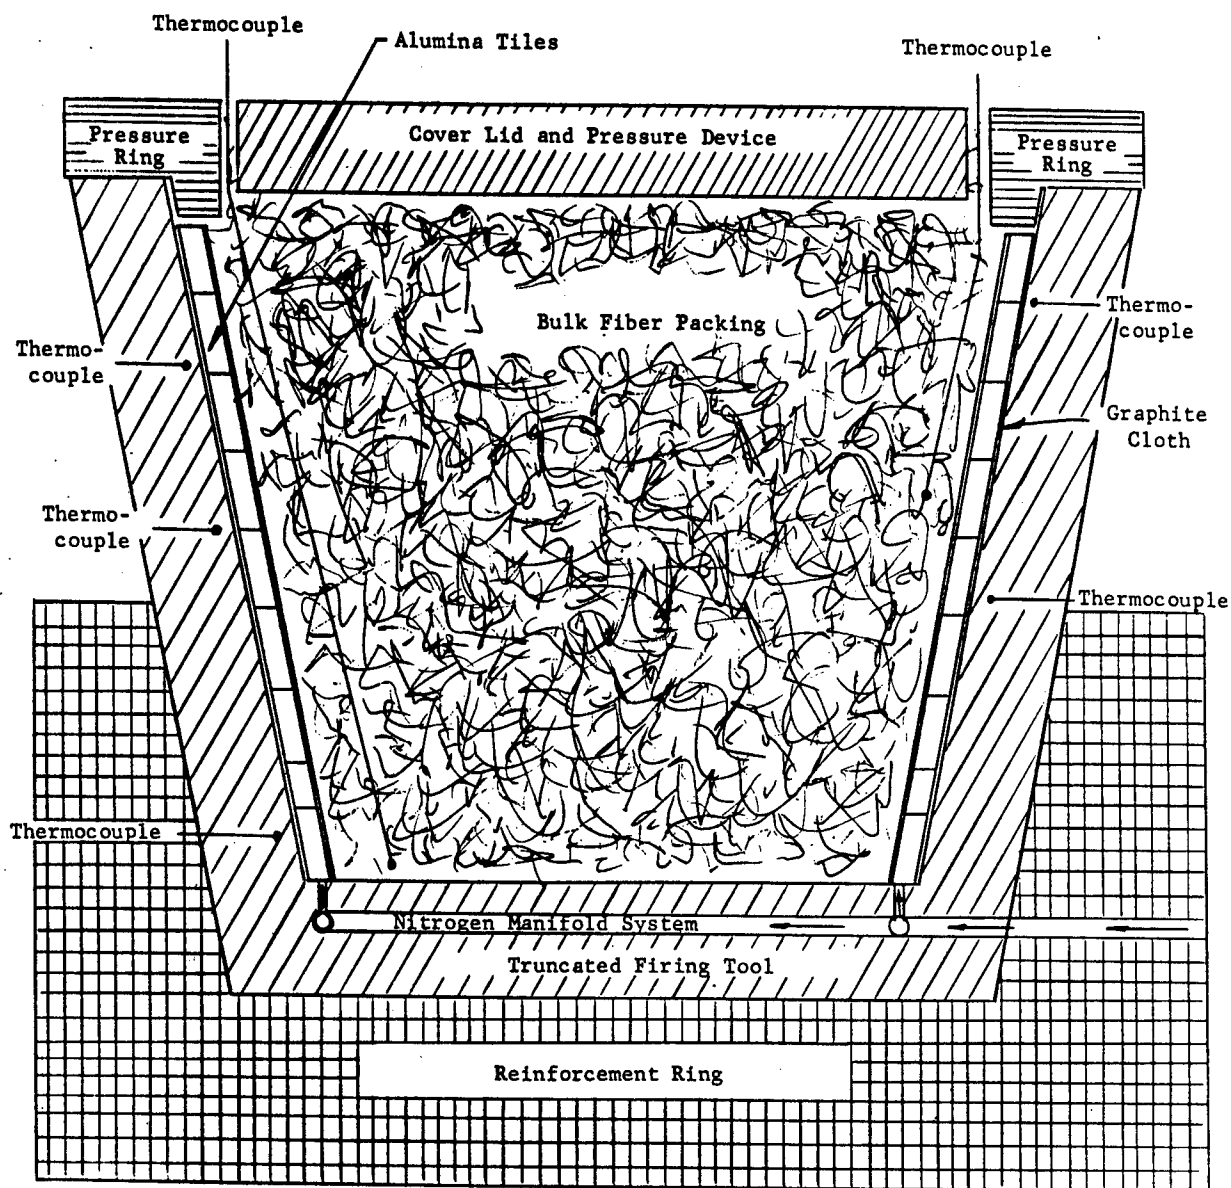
Cross Section of Truncated Section and Tooling Firing Arrangement
